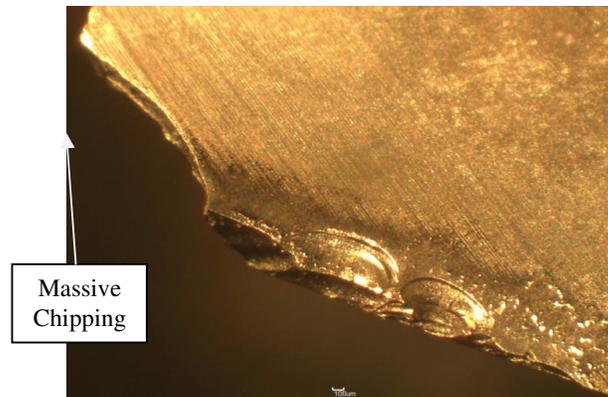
Tool rake for treatment 24 m/min and 0.25 mm/rev
